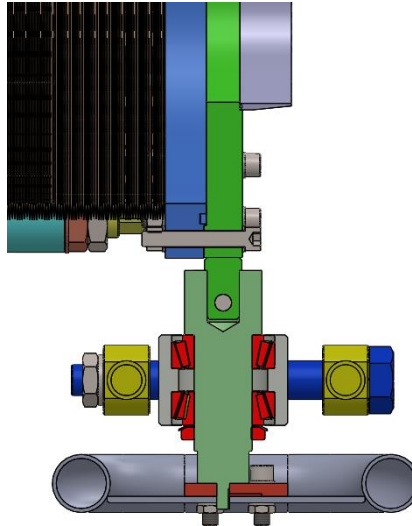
Cut view of kinematic mechanism with hydraulic cylinder
